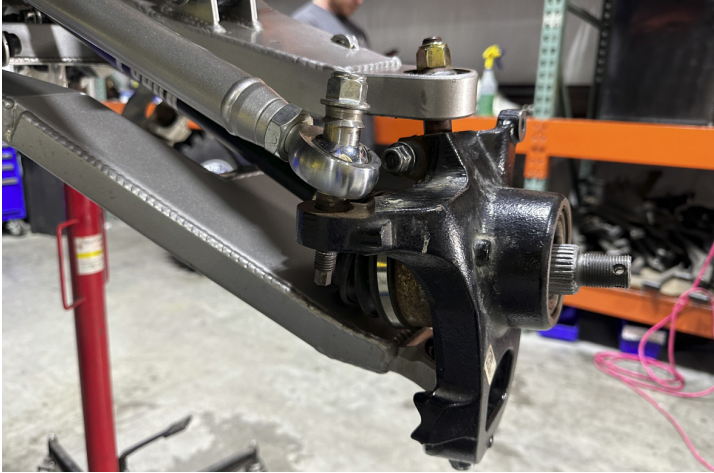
Fasten Tie Rod to Knuckle using an 18mm Socket
